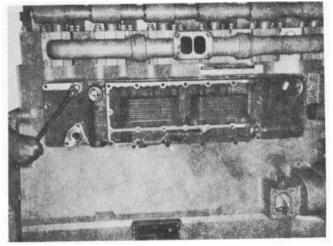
B-14. Remove the Lubricating Oil Cooler Housing
